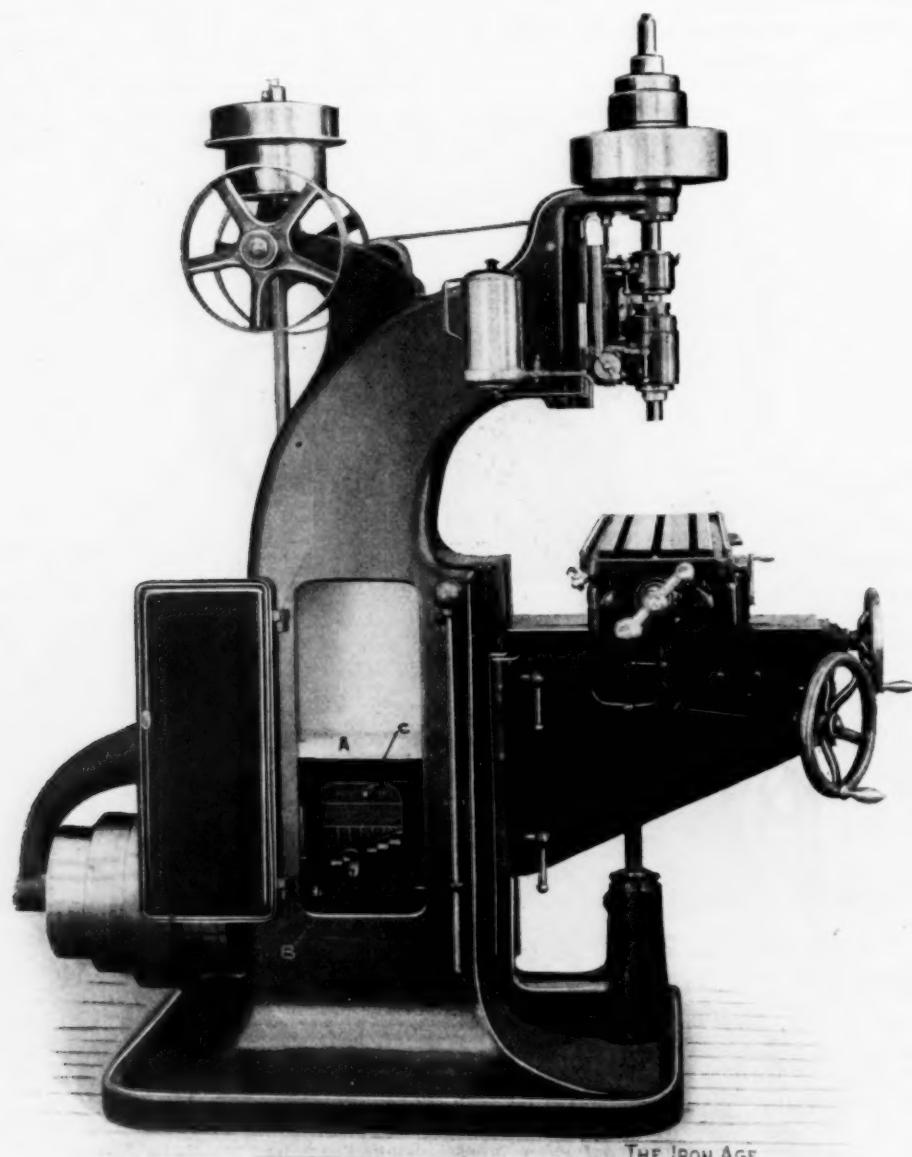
Side View.—Brown & Sharpe Vertical Spindle Milling Machine.
